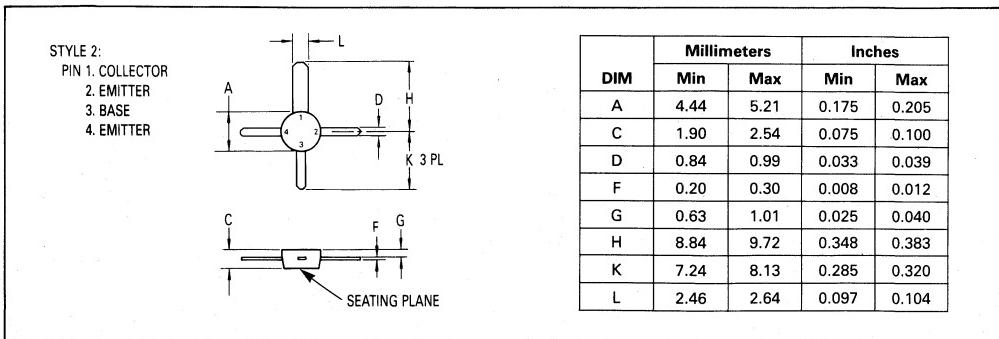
Case Outline Drawing of the PowerMacro Package
